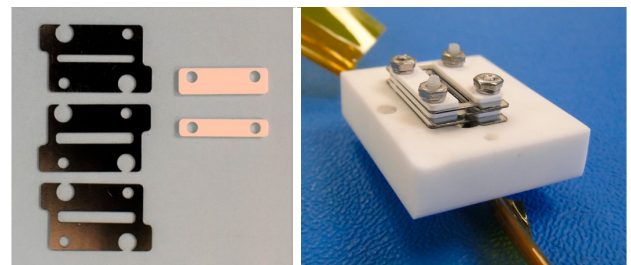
Laser cutting. Molybdenum sheets and alumina laser-cut and stacked onto an electromechanical device.
